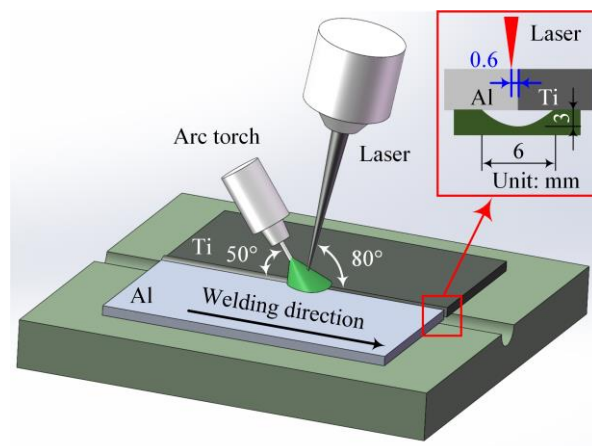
Schematic diagrams of laser-MIG hybrid welding–brazing process and laser offset distances.
